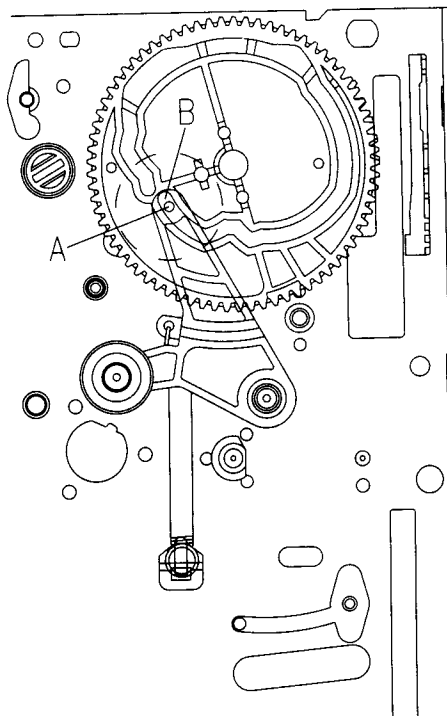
DATUM POSITION OF PINCH LEVER TOTAL ASS'Y & CAM GEAR
